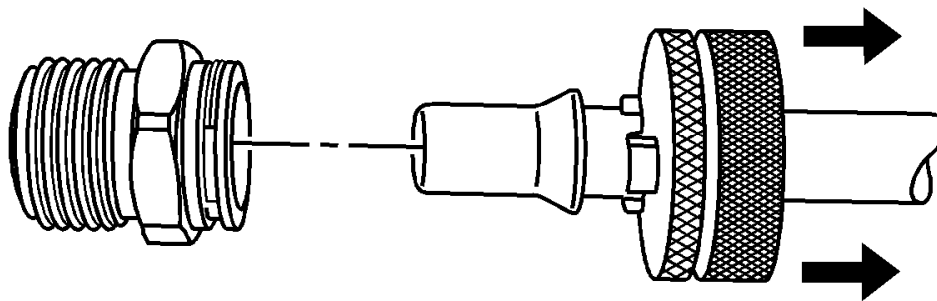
View Of Quick Release Tool & Generator Cooling Inlet Pipe
